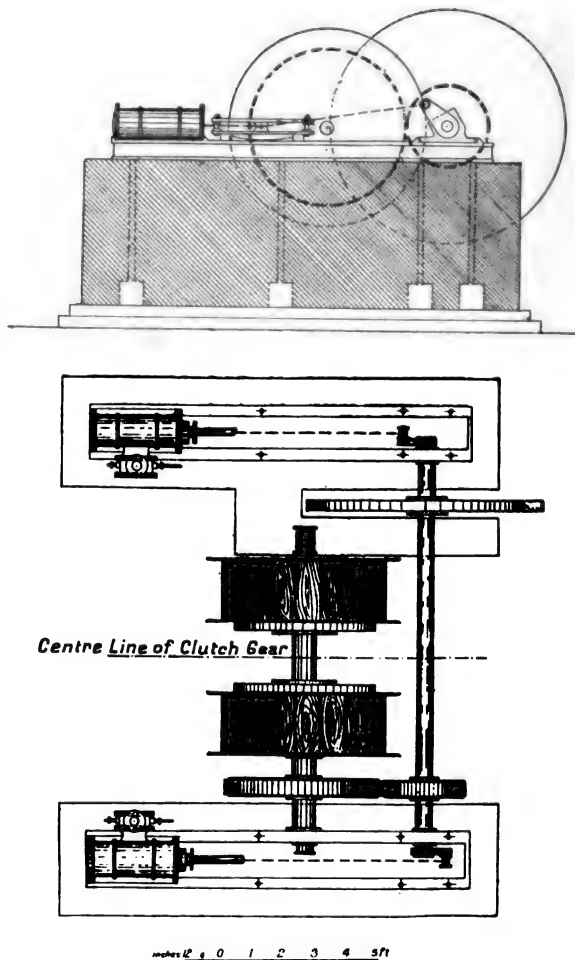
, 313 show the plan and elevation of a good arrangement of engines for this system, both drums being placed on one driving shaft. The engines, as in the direct rope system (and for the same reasons), are better placed underground.
